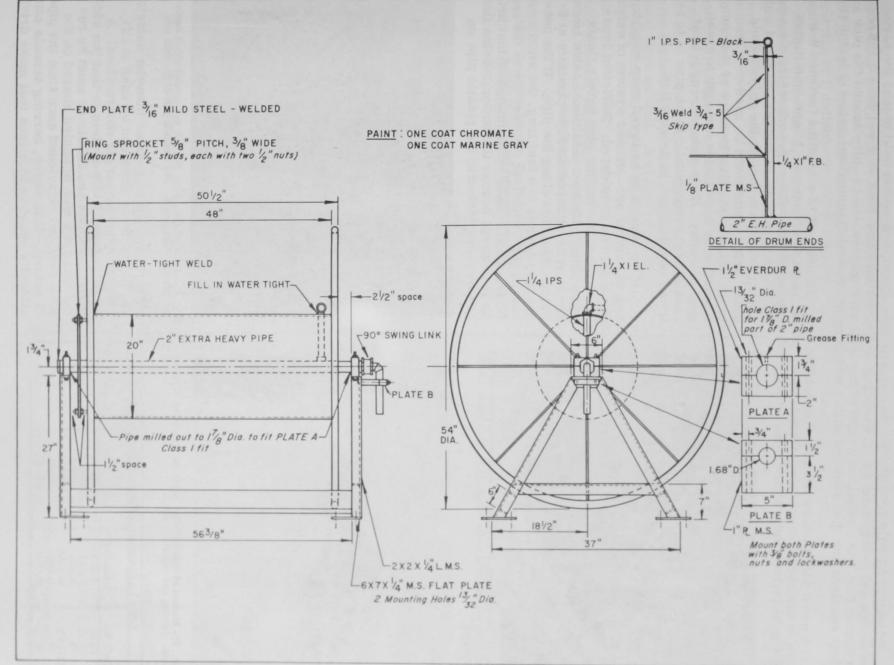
Drawing of plastic pipe reel for handling 400 fathoms of air-curtain equipment.
